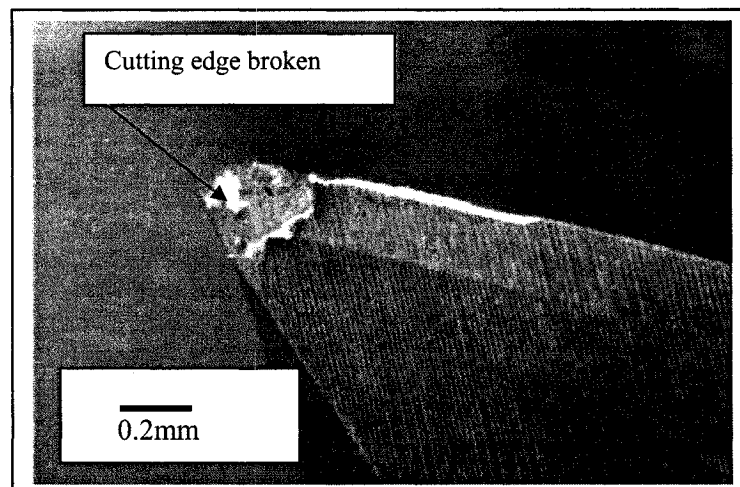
Wear surface, cutting speed= 70 m/min (1170 rpm), depth of cut = 2.8 mm, feed = 0.05 mm/tooth, unstable(chatter)
